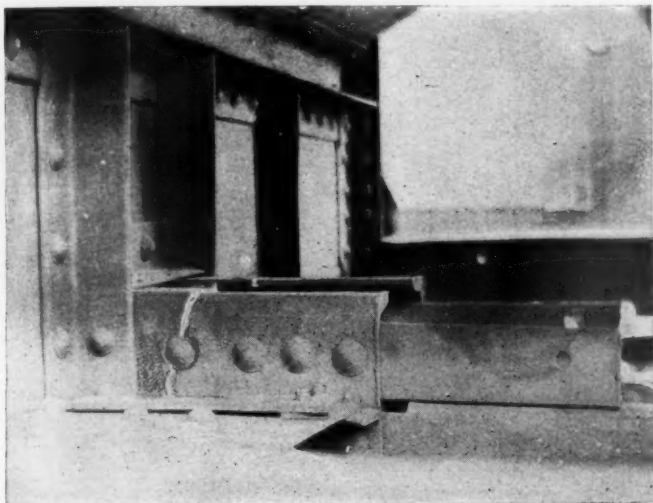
Common Failure When the Draft Arms Are Riveted to the Center Sills.
